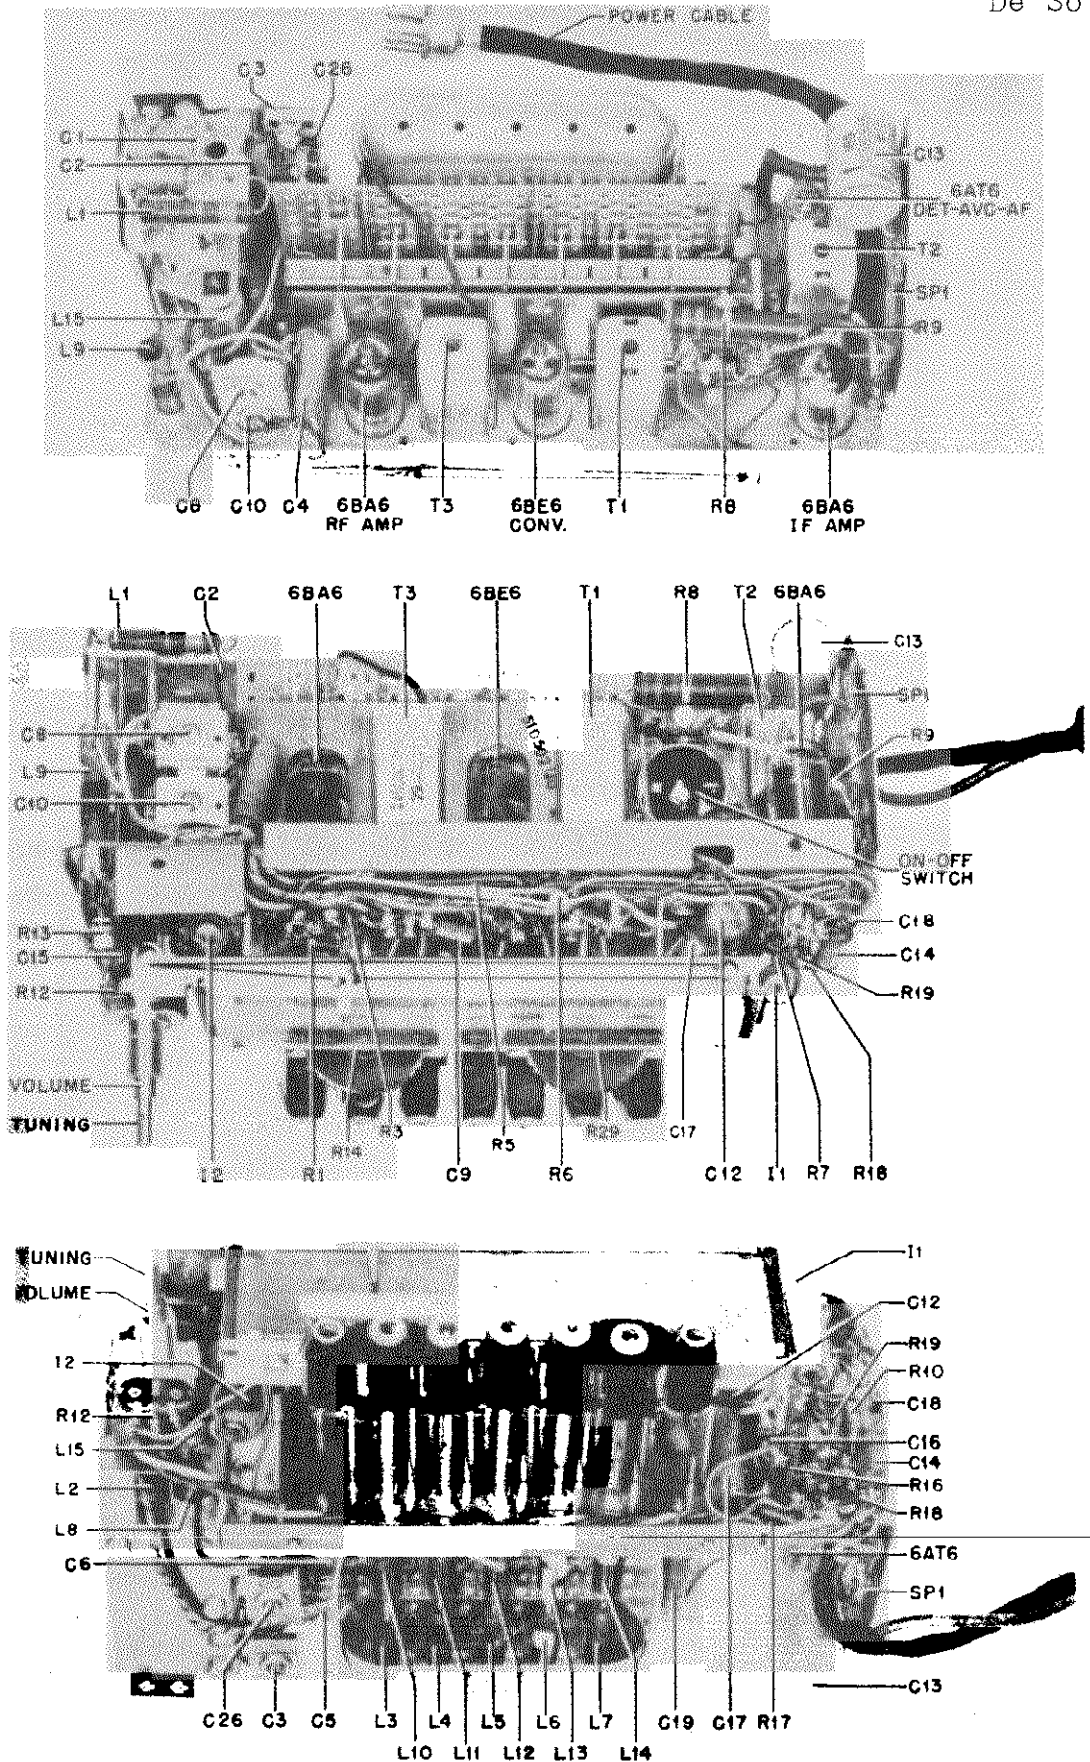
PARTS LOCATION - CONTROL UNIT
